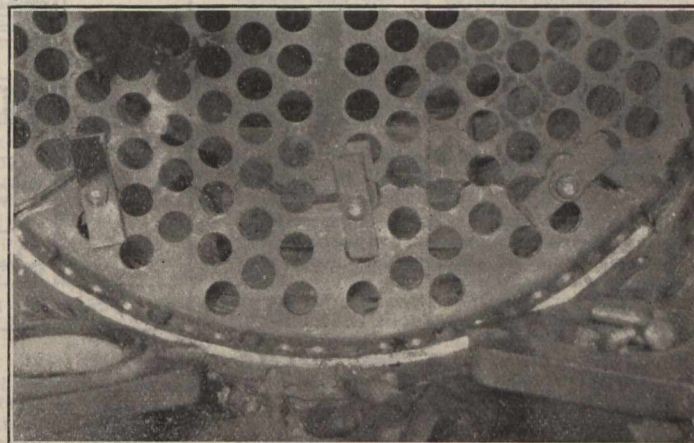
Repairing the Front Tube Sheet by the Oxy-Acetylene Process.
